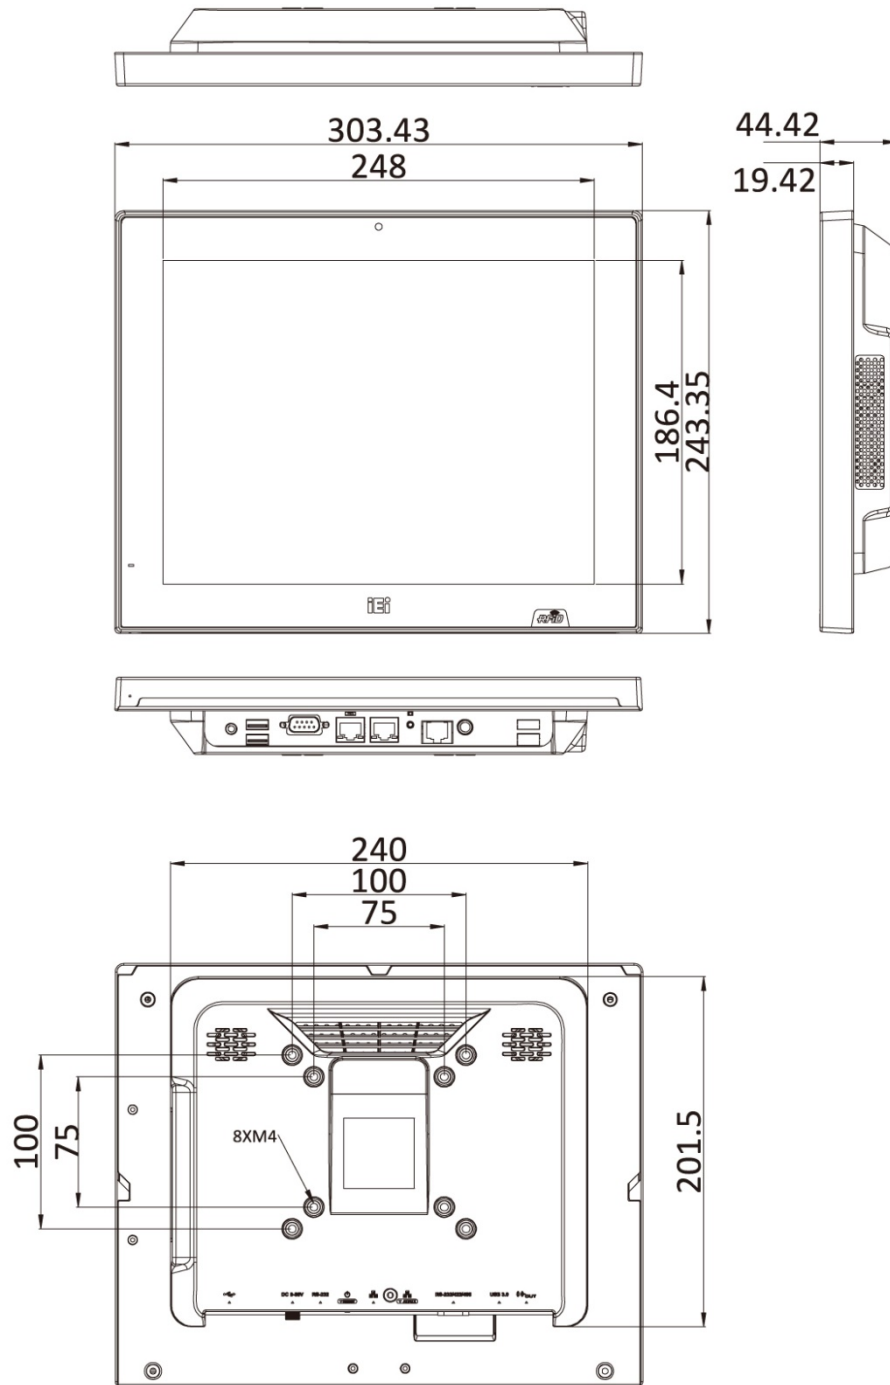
AFL3-W10A-BT Dimensions (mm)
